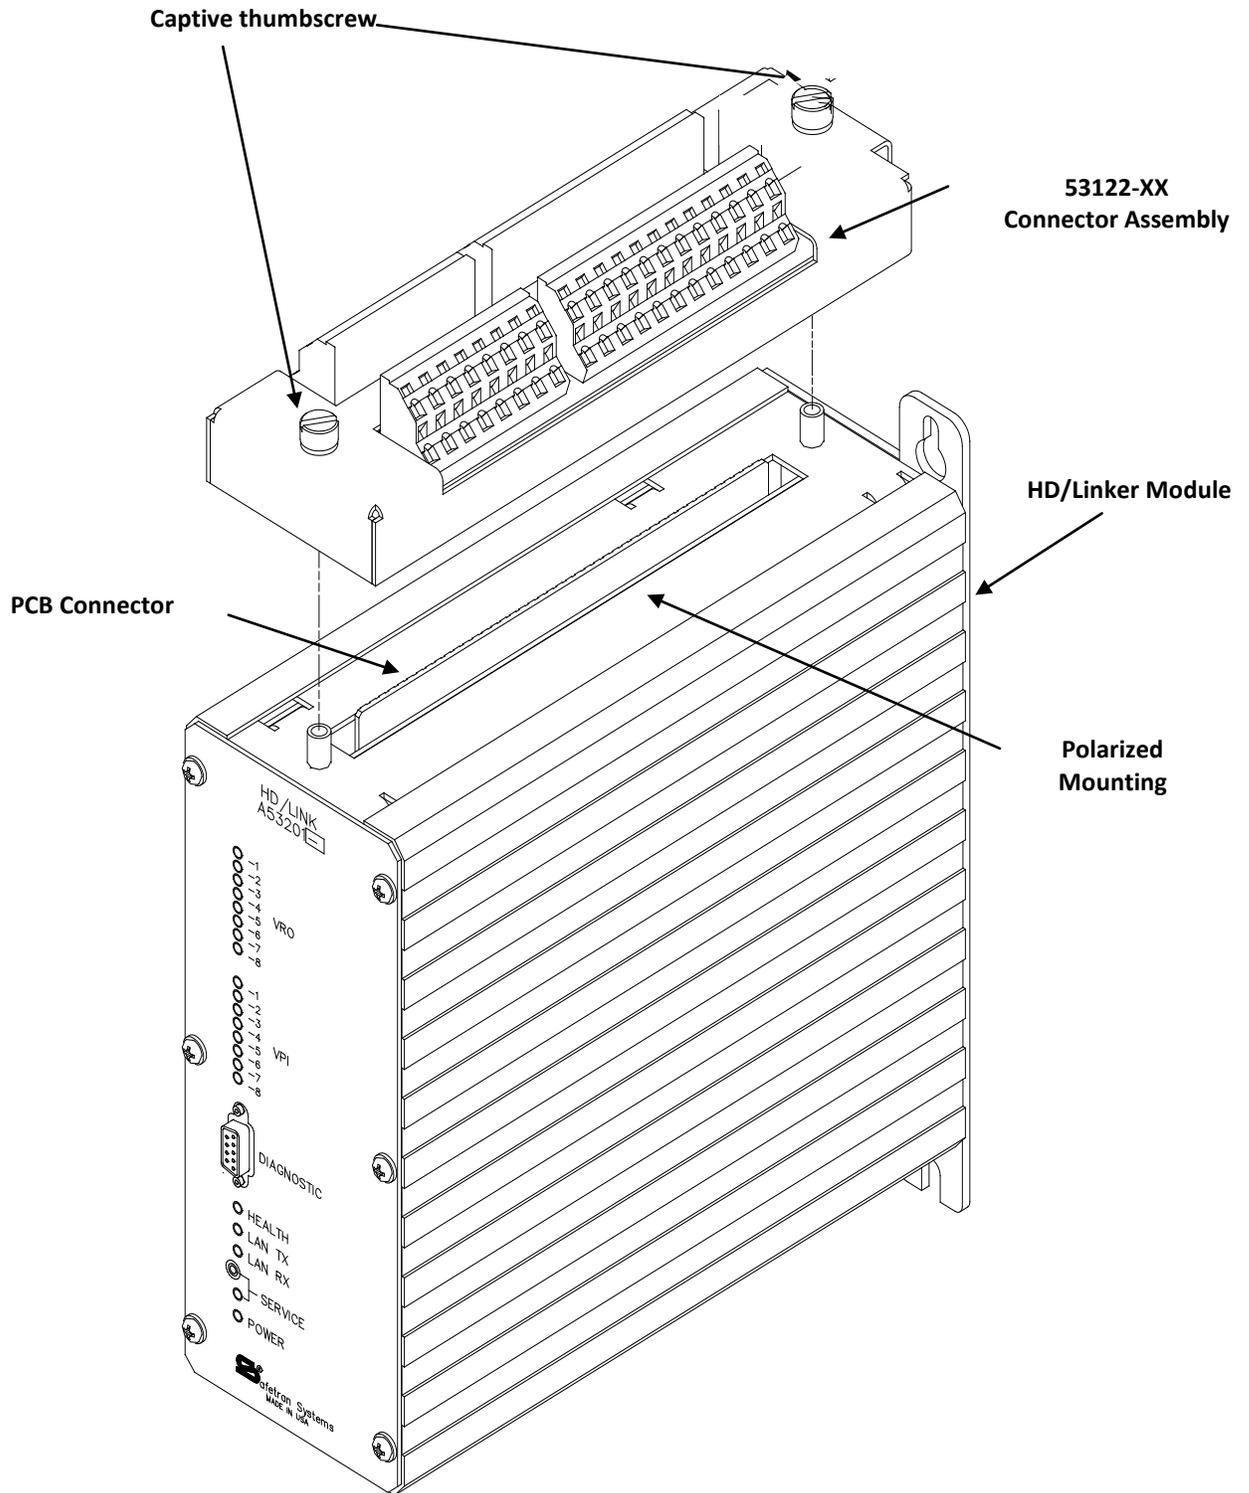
I/O Connector, ECD, and HD/LINK Module
